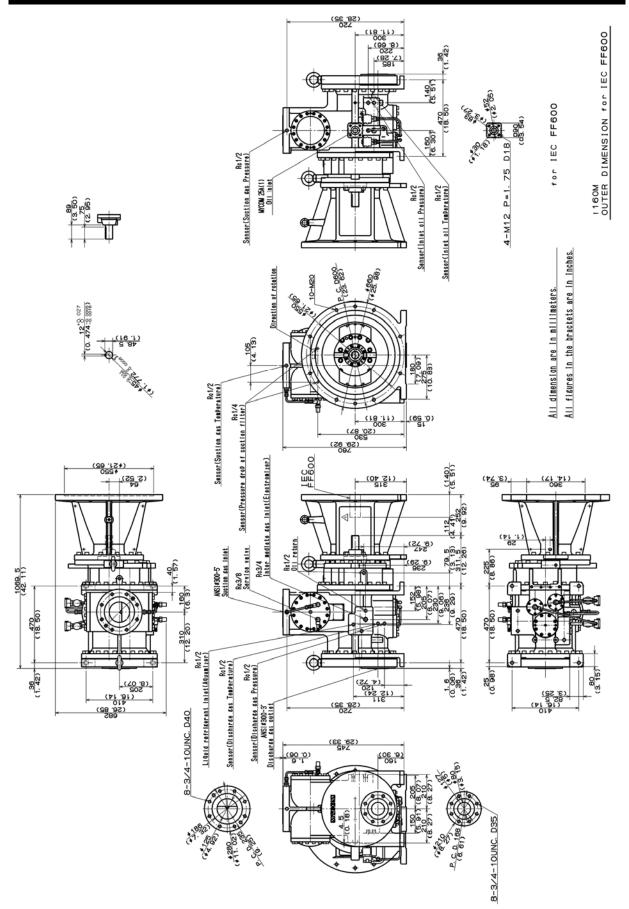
i160M Outer Dimensions with a Spacer for Flange Motor (IEC FF600)
